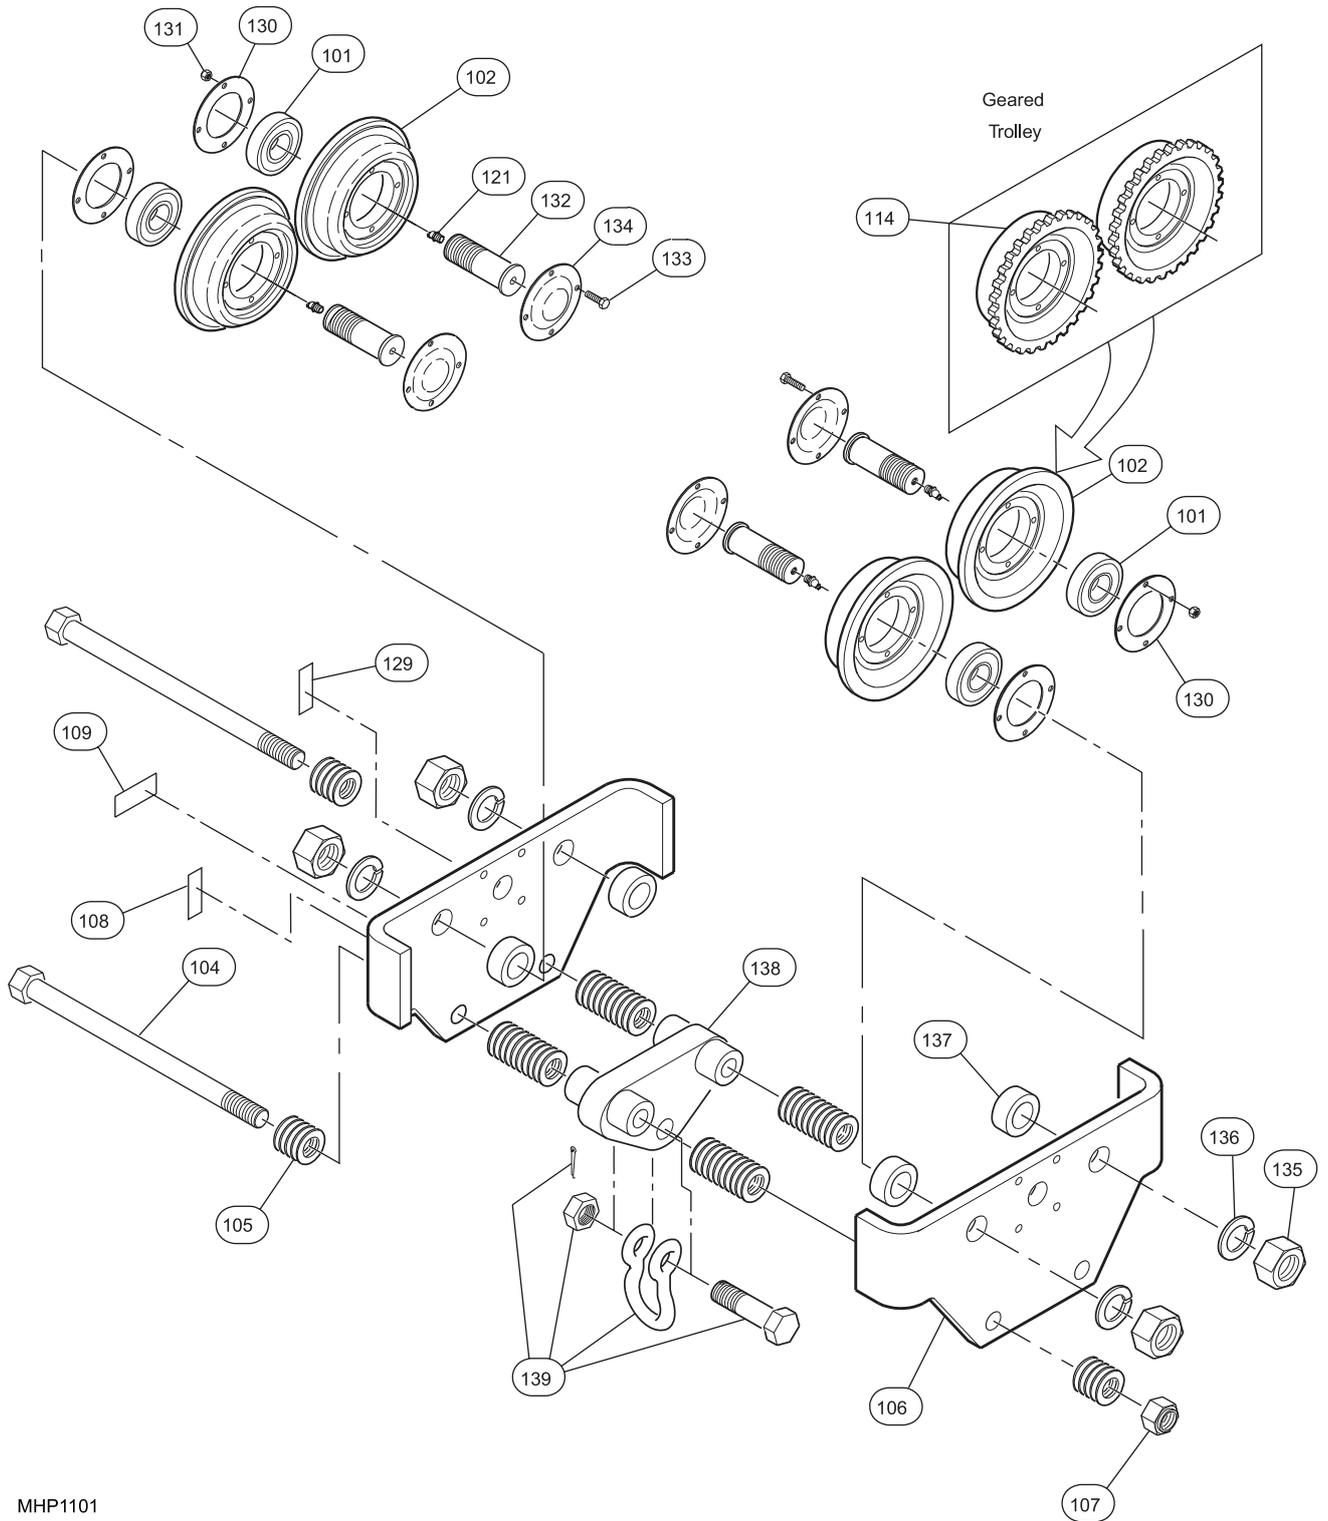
RT010 Rigid Trolley Assembly - Exploded View
